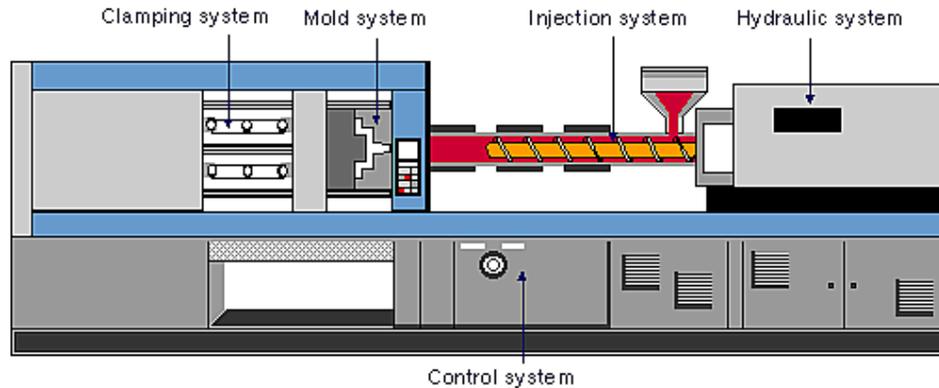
Injection Moulding Machine (Source: PMolds Industrial)
